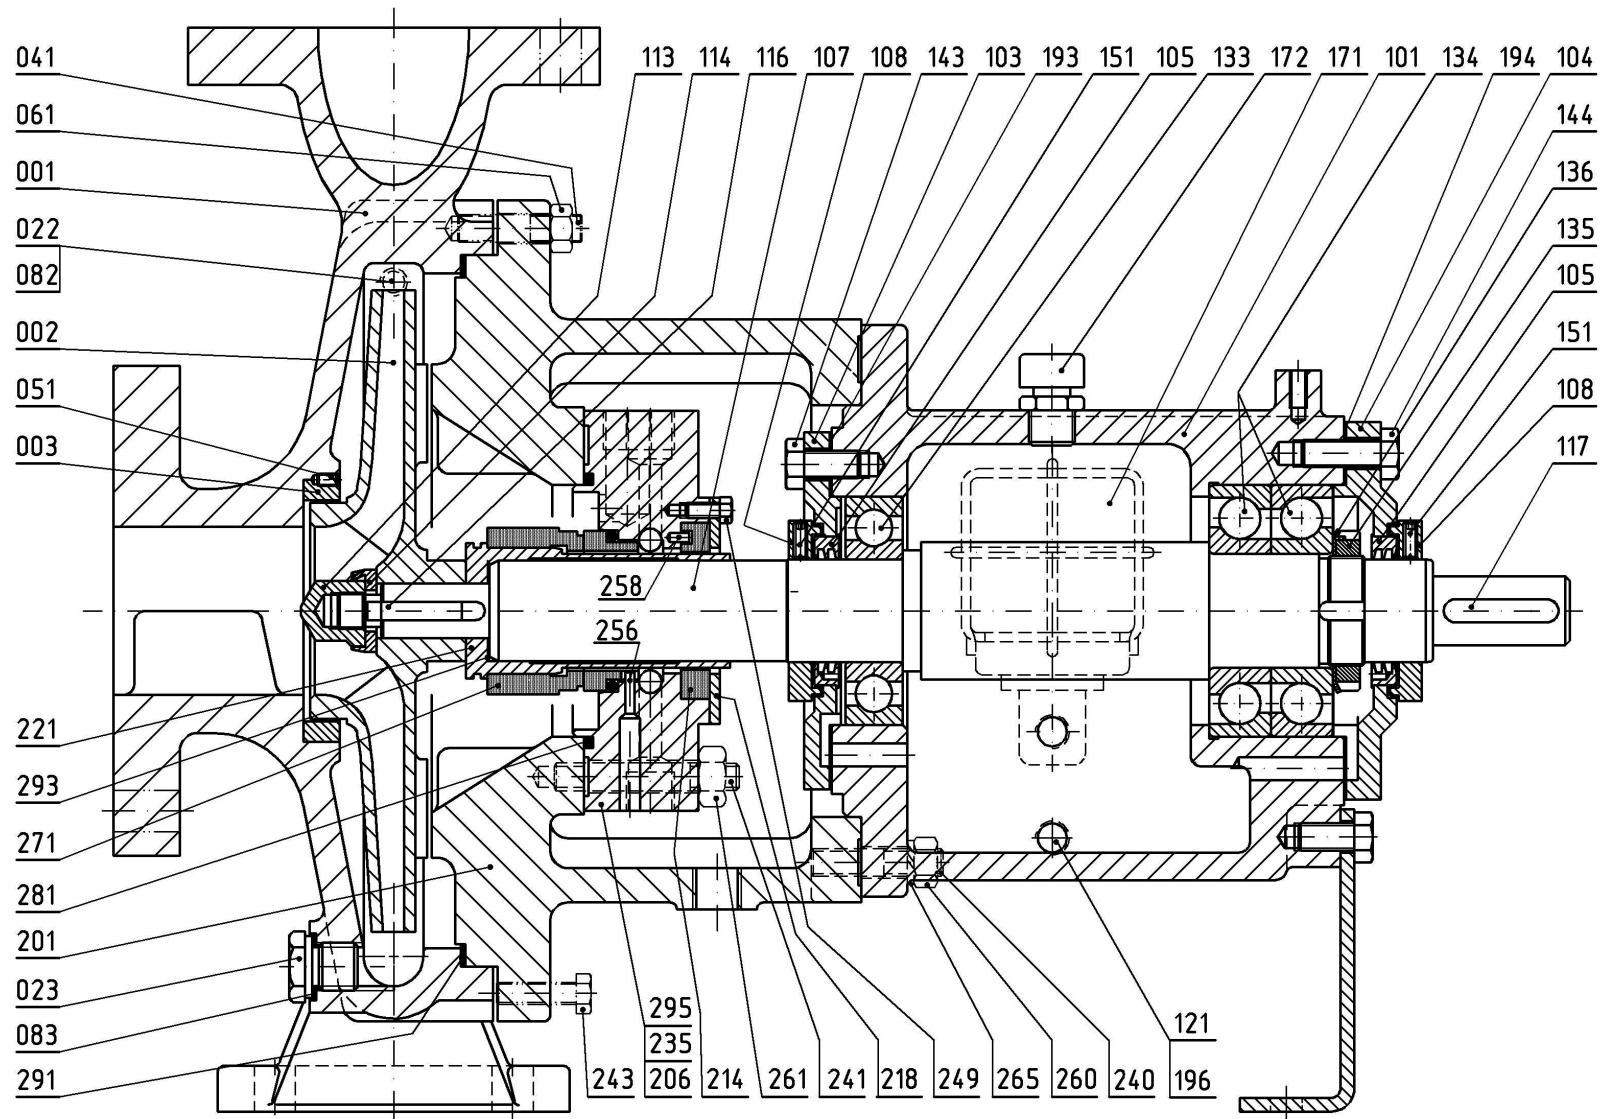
The assembly drawing of the pump with the single non-cartridge face seal.
